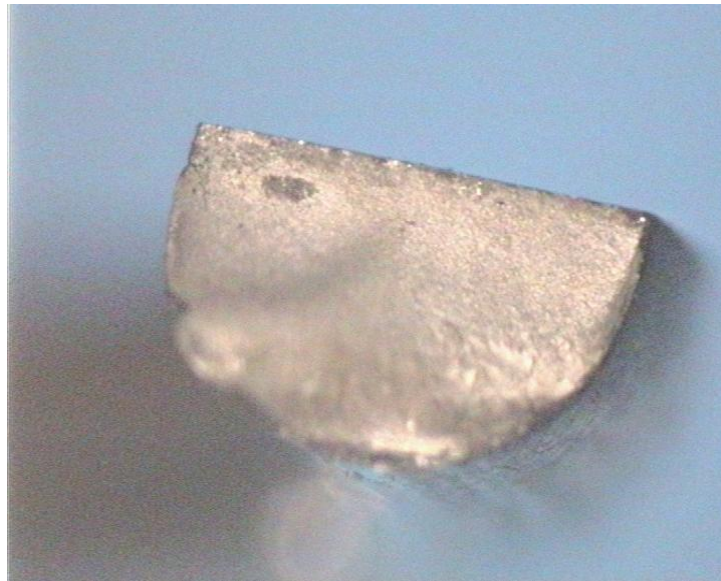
Figure A End coil failure in titanium alloy spring. Fatigue fracture initiated at wear. Dark area at origin is an oil stain. This grade of spring material is more susceptible to wear initiated fatigue failures than any other.
